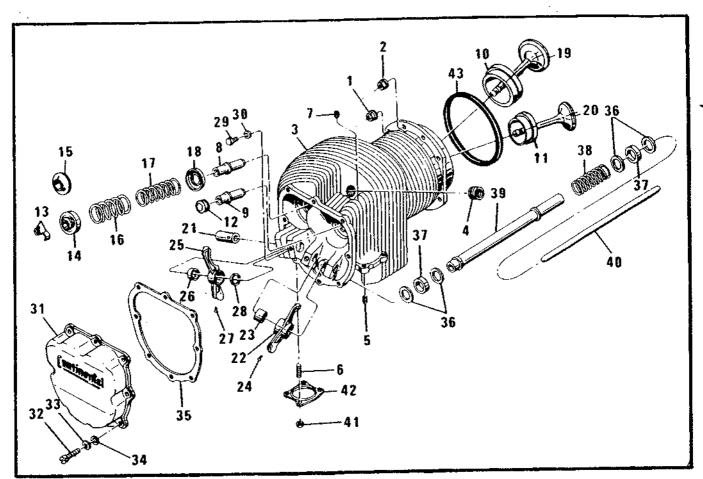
CYLINDER ASSEMBLY MODELS 10-470-C,D,E,F,G,H,L,M,N,P,R,S,U,V
